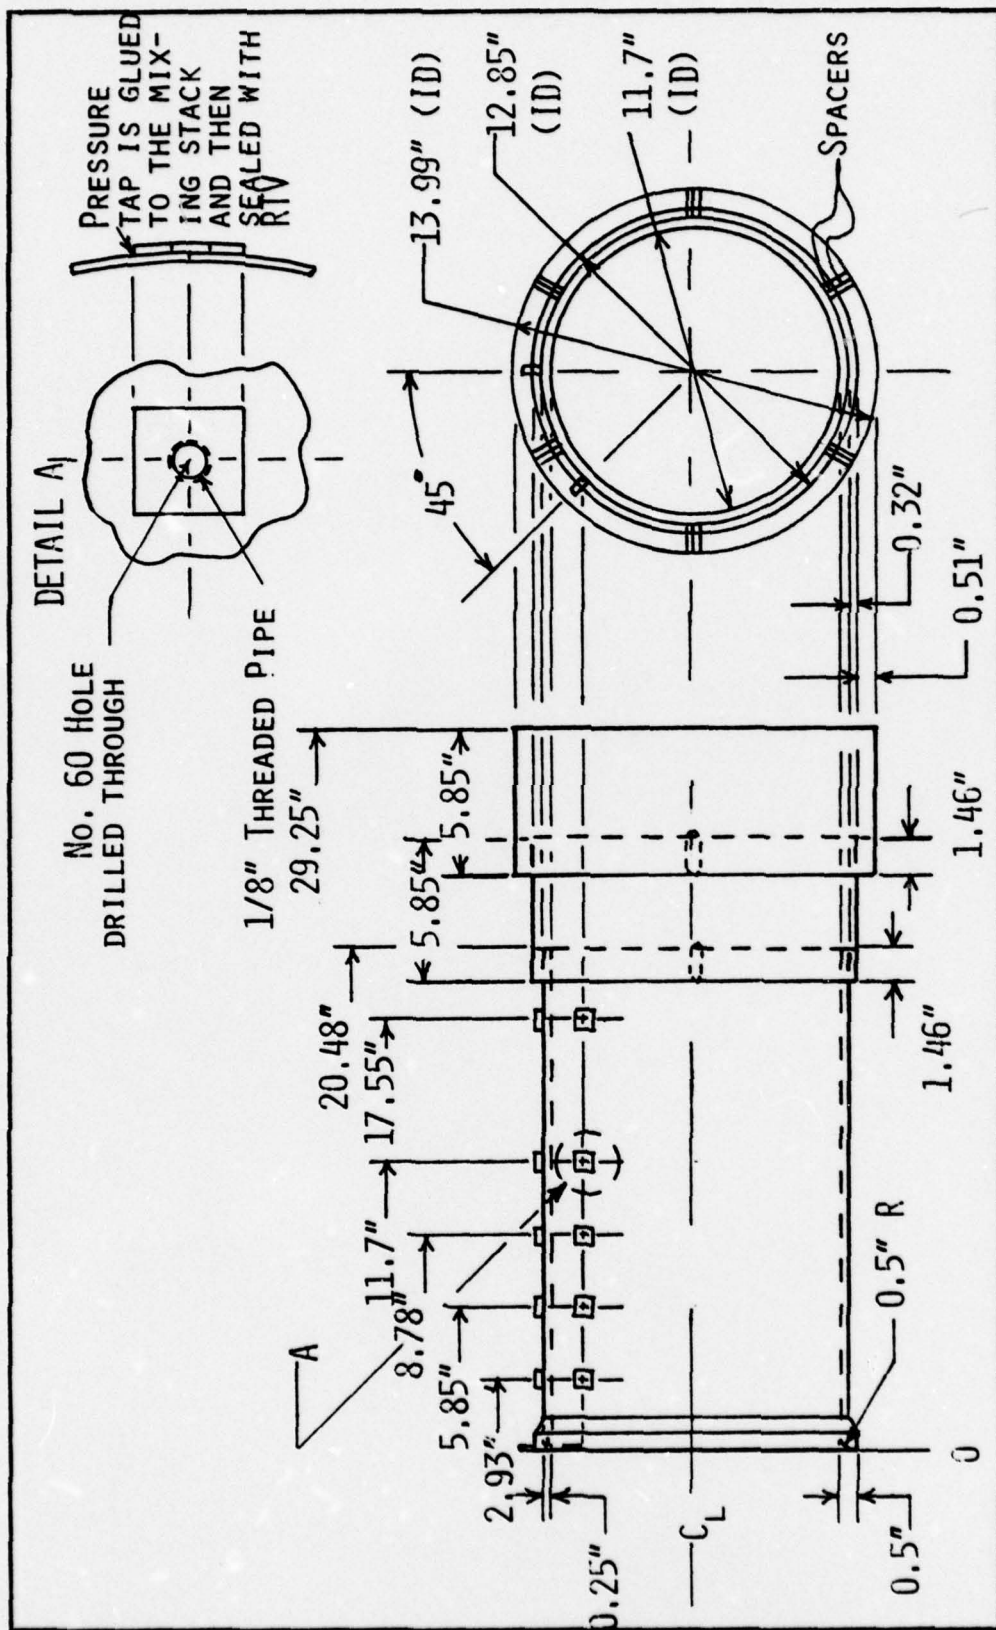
DIMENSIONAL ILLUSTRATION OF MIXING STACK WITH TWO-RING DIFFUSOR
